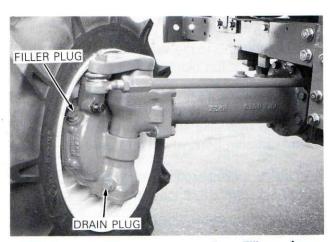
Final Reduction Gear Case Filler and Drain Plug
